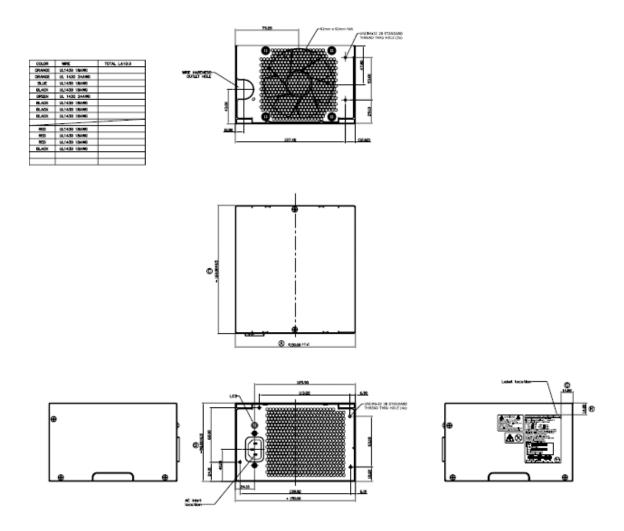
Mechanical Drawing for 550W Power Supply Enclosure
